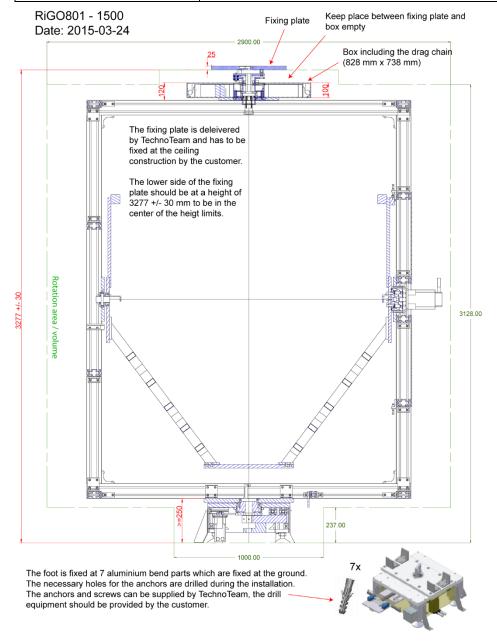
Schematic sectional drawing of RiGO801 - 1500
